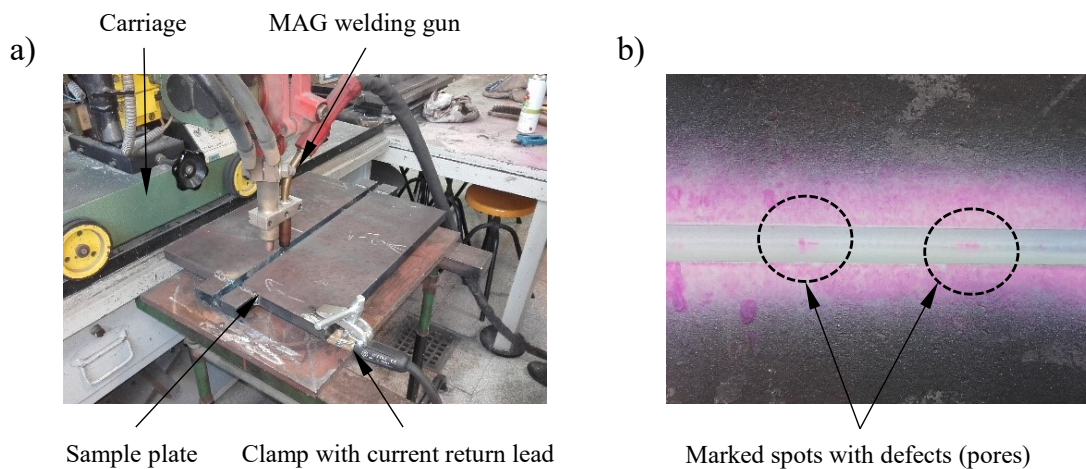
Important details in the welding process; a) setup of the welding equipment and b) detail of the deposited layer in the weld root, inspected with the penetrant method.
